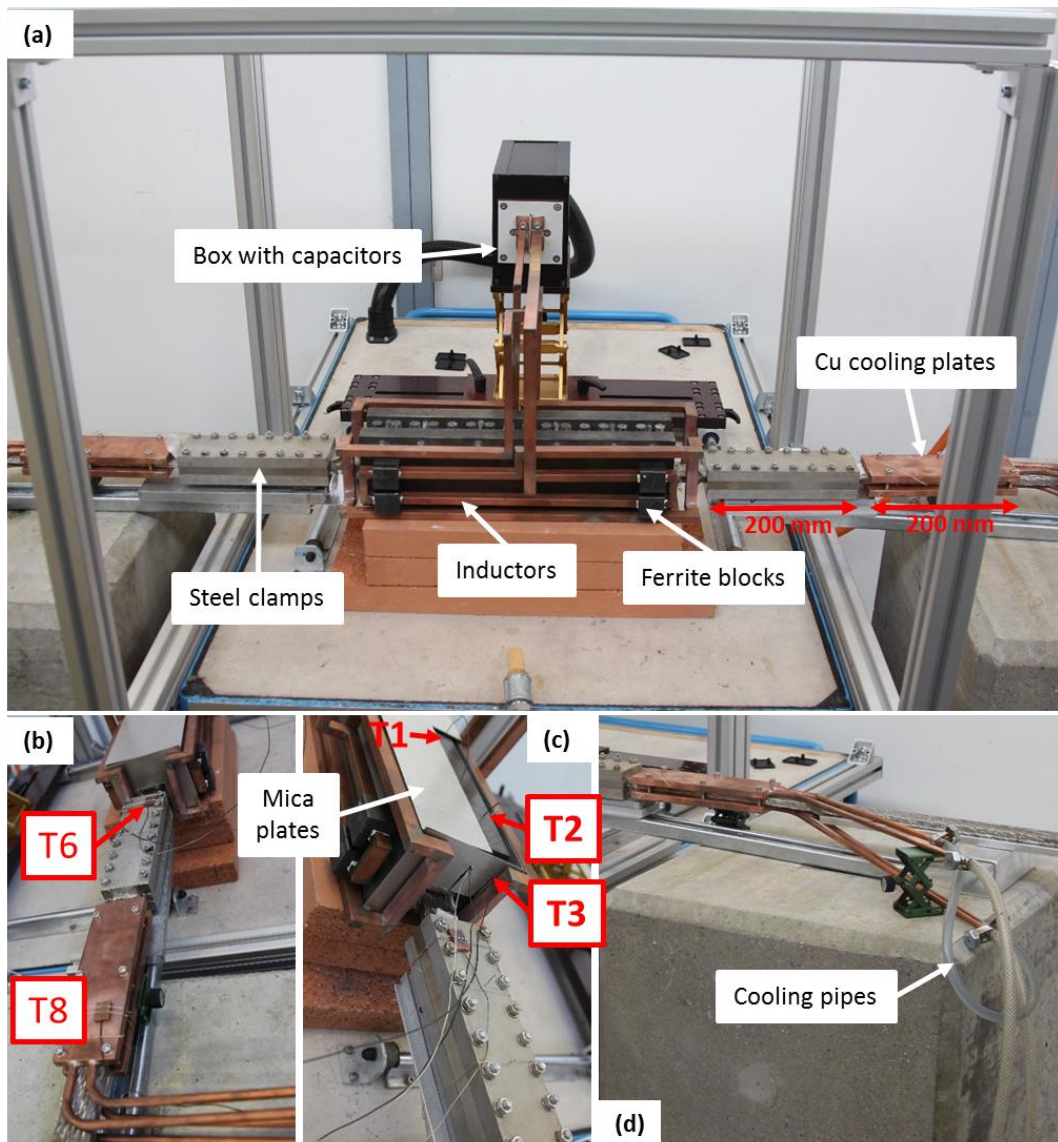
Diffusion-bonding set-up and temperature sensors position. (a) View of the assembled Inconel-steel clamp on the mobile station; (b) left supporting steel clamp and cooling copper plates; (c) right supporting copper plates; (d) cooling pipes connected to the copper plates.
